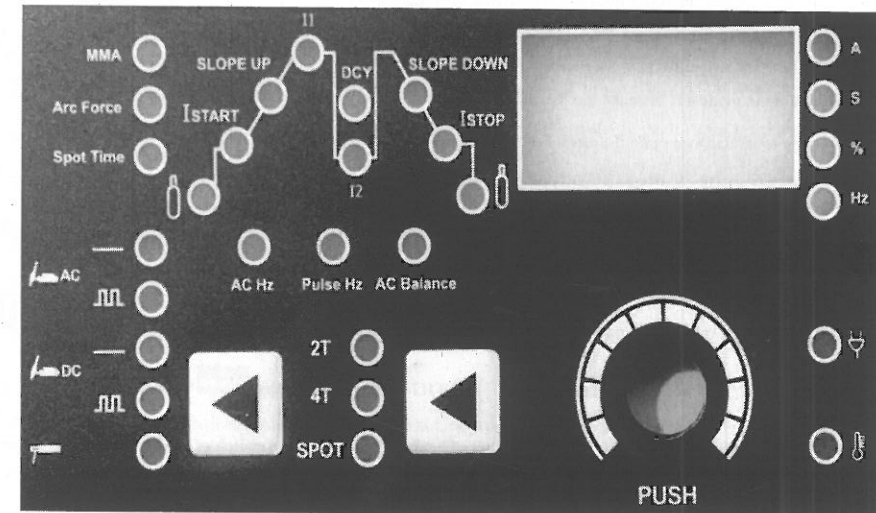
The operation control panel of the WSME-200X welding power source
